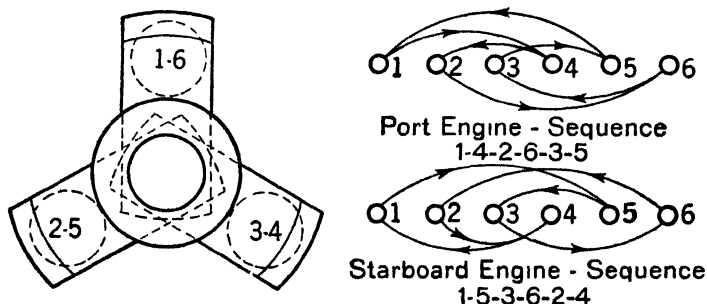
Arrangement of Cranks and Firing Sequence of Six-Cylinder, 4-Cycle Marine Engine Crankshaft
